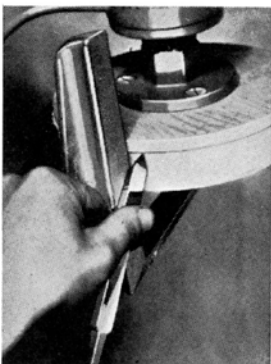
Making the Finishing Cut with a Spear-Point Chisel
